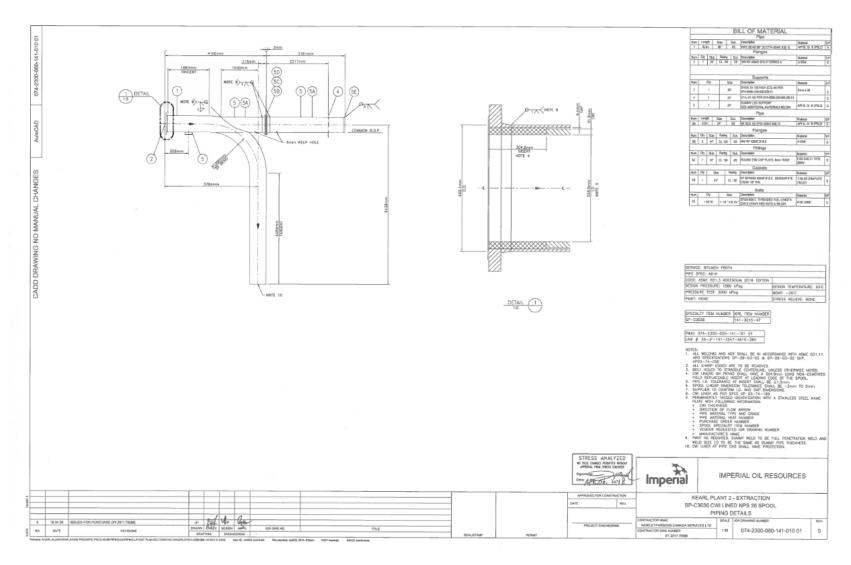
WP drawing 074-2300-080-141-010 01 Rev 0
